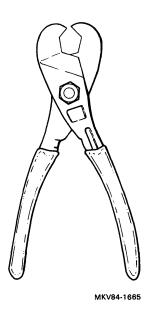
DIGITAL 29-24667 Coaxial Cable Cutter
